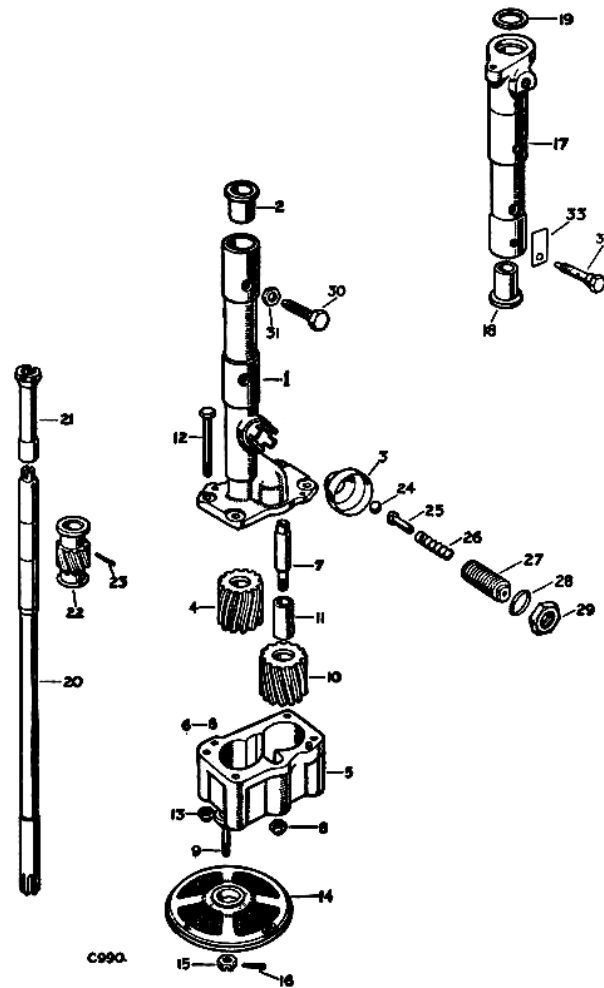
Exploded view of oil pump and driving gear, Petrol models.
